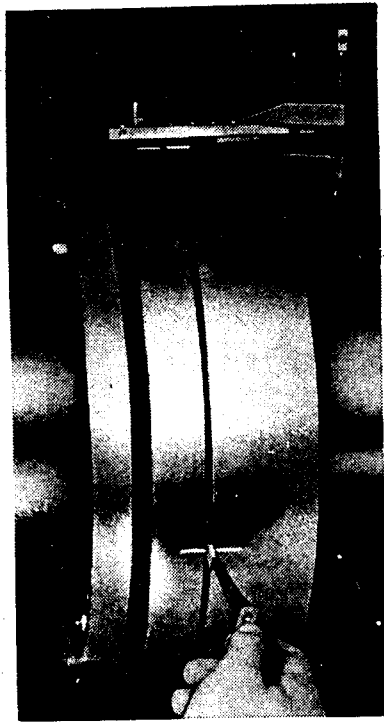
Checking the alignment using feeler gauges & gauge blocks
